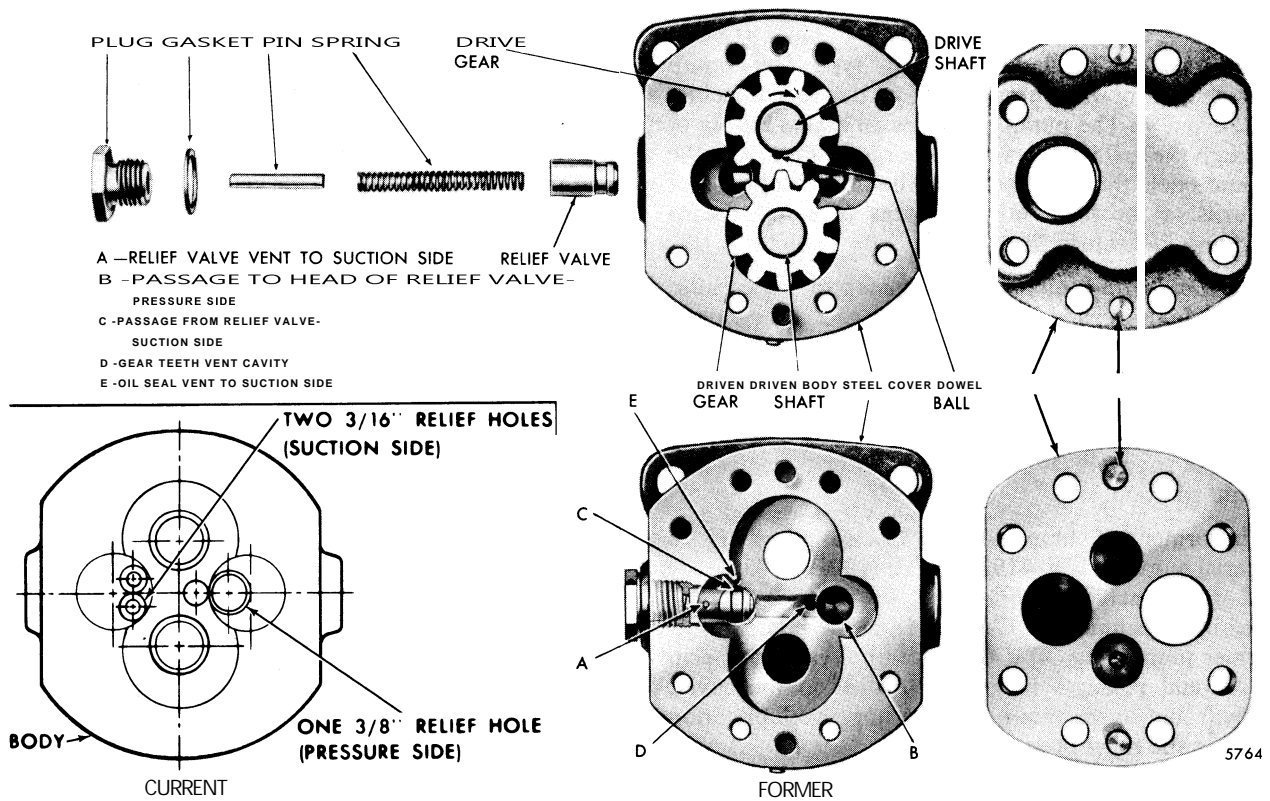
Typical Fuel Pump Valving and Rotation (Early and Former Pumps)
